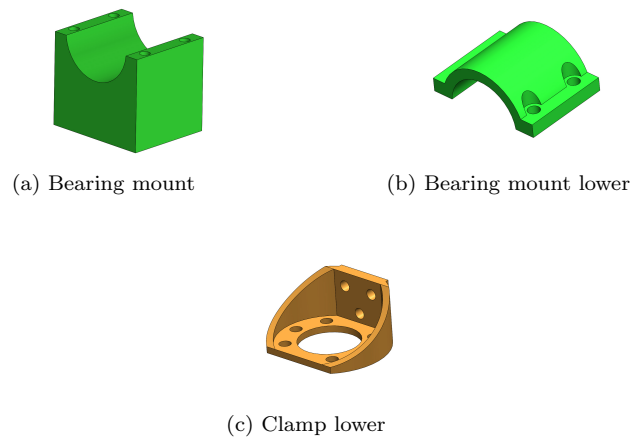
This figure demonstrates the created parts for the horizontal motion. The bearing mounts are made to connect the base plate to the stainless rods and the ball bearings. The Clamp is made to connect the base plate with the horizontal ball screw.
